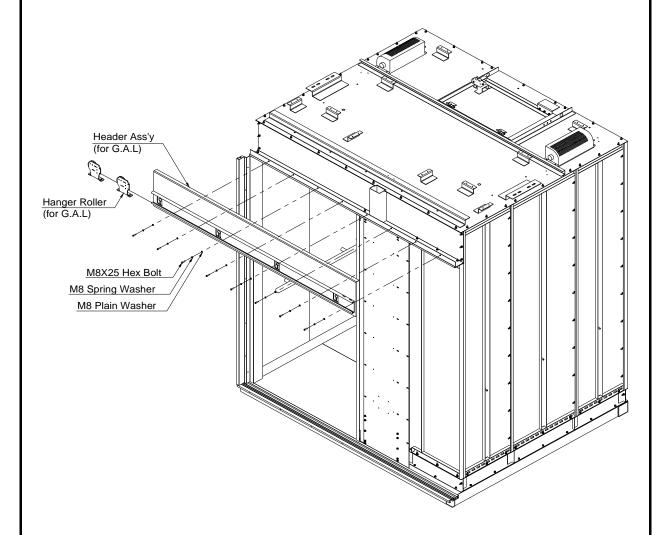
A. INSTALLATION CAR HEADER
